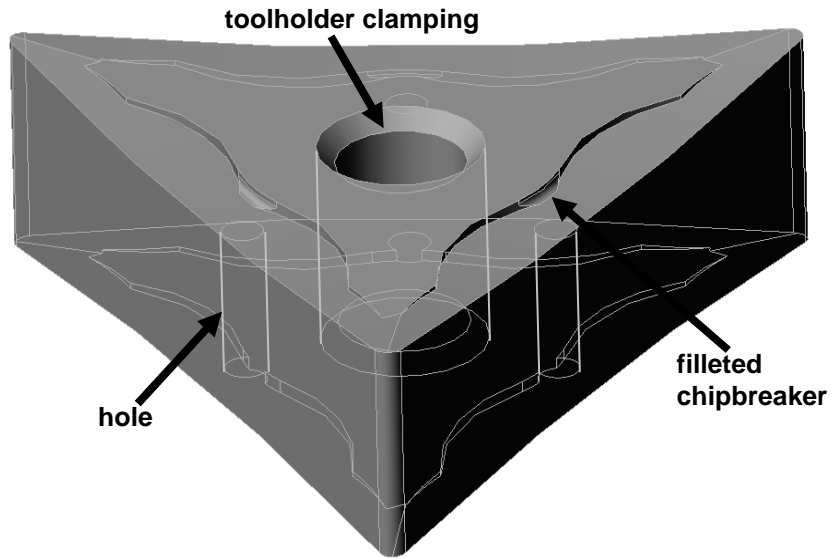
3D shaded sketch with visible edges. The holes for thermocouple, the hole for toolholder clamping and the chipbreaker
